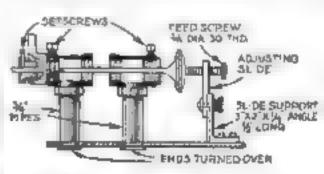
The method of bolding the valvestem, which is revolved by a hand crunk
